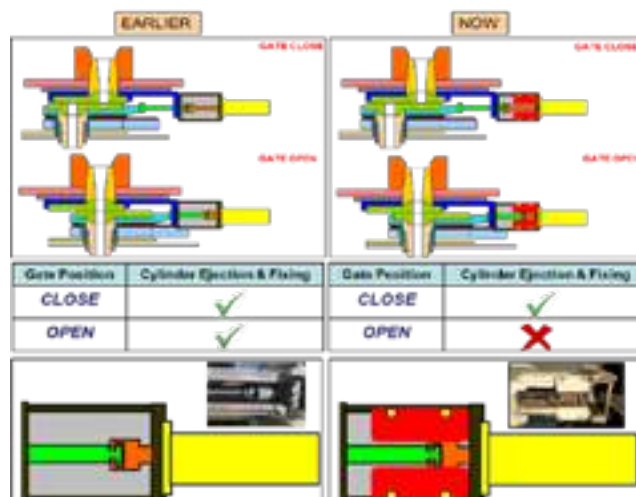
Fixing of stopper plate in LSG machine to ensure ejection of hydraulic cylinder in close position.
